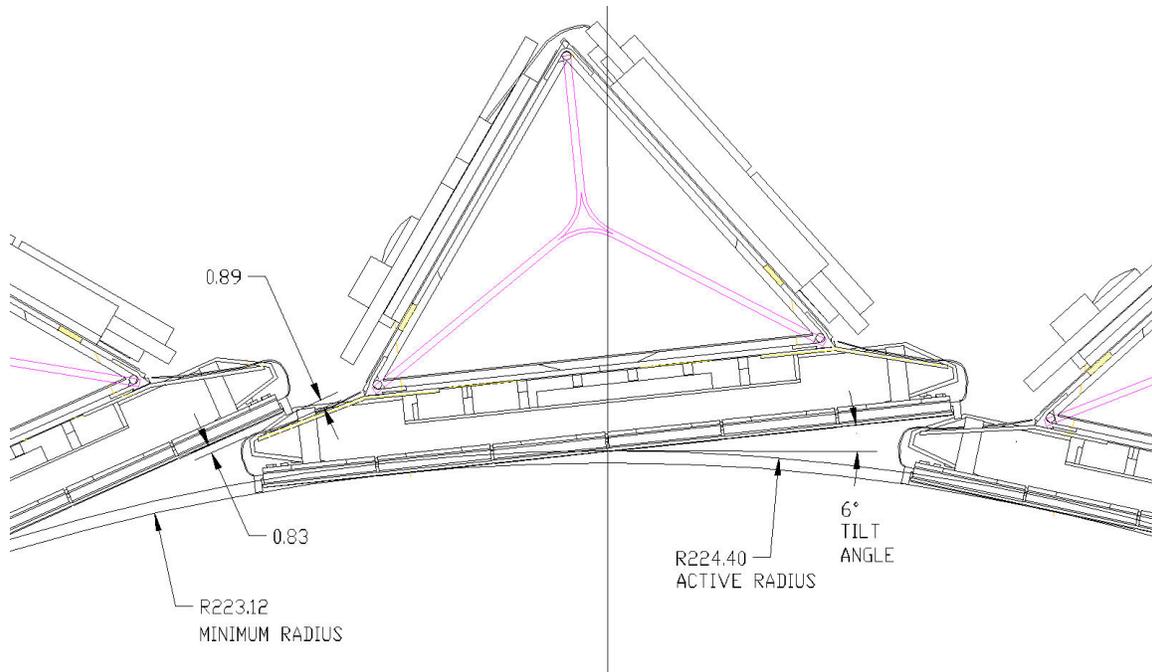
Physical location of each ladder. The length dimension is in mm. The tilt angle is 7° to provide clearance for a post on the modules.
